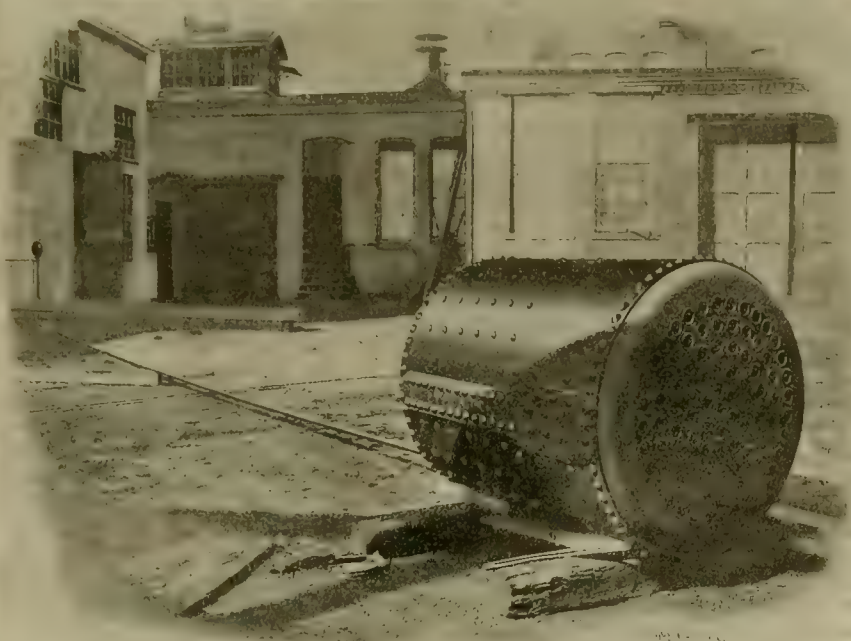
SHOWING THE BOILER, SUPPLY PIPE AND PRESSURE GAUGE.
